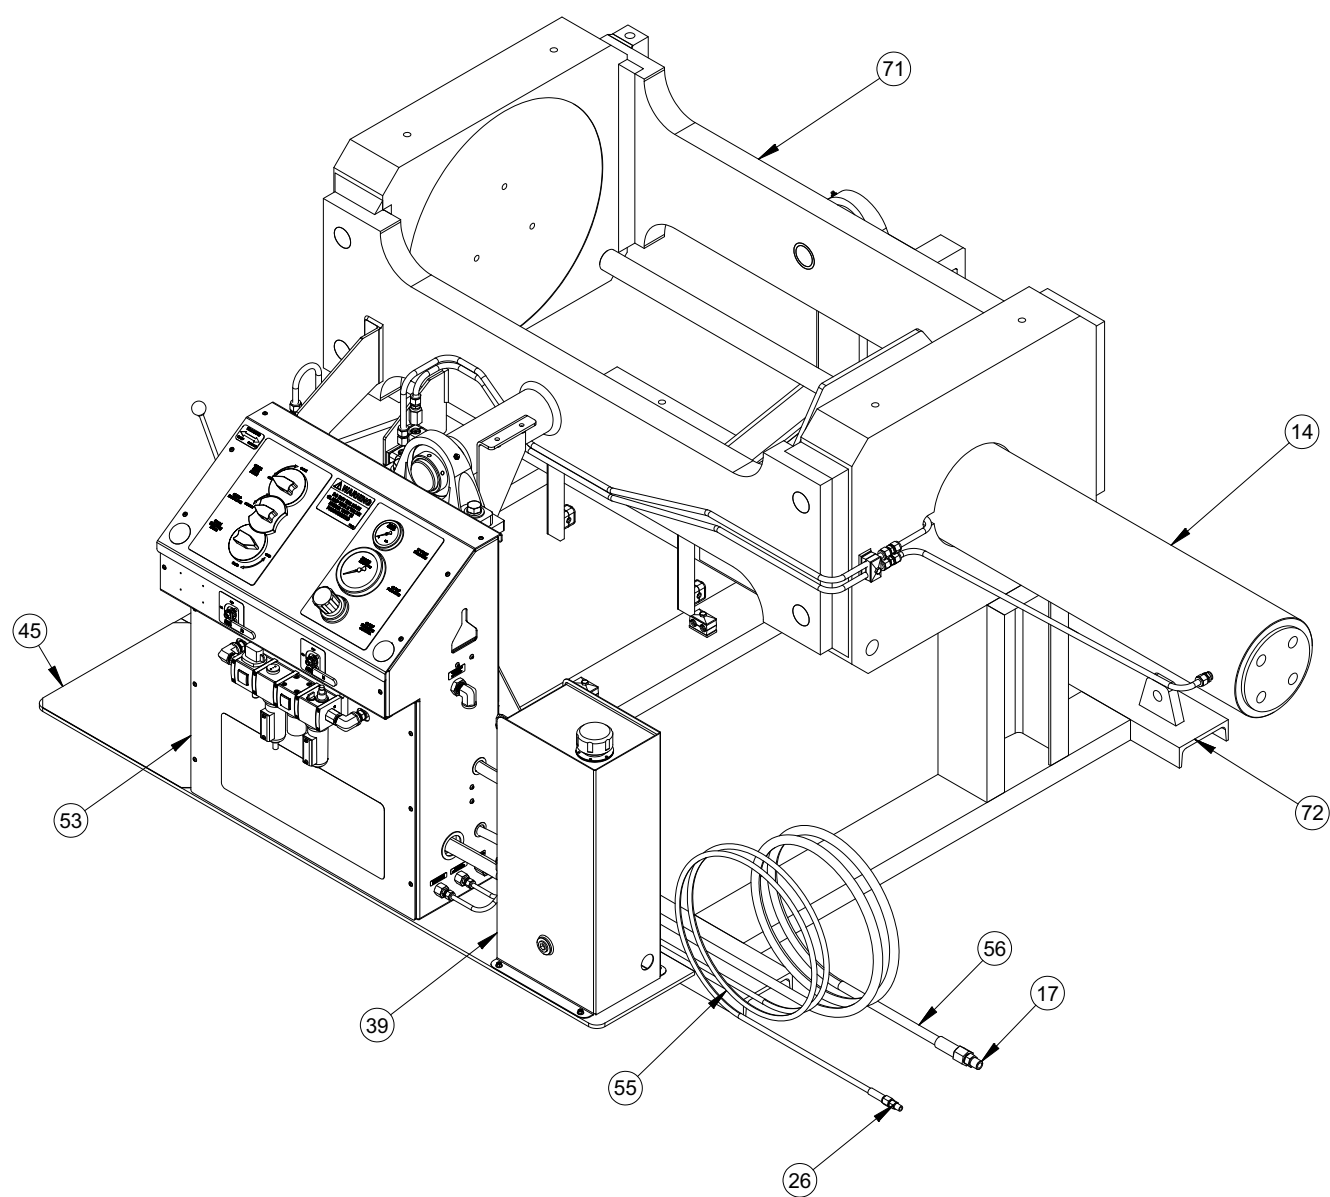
USV-16-200T ASSEMBLY 1 (P/N 91593)
